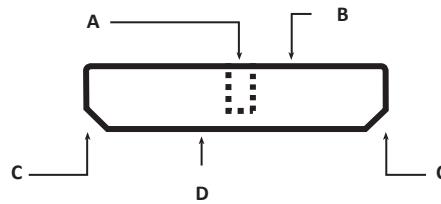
B: Minimum Installation Requirements for Weld on Steel
